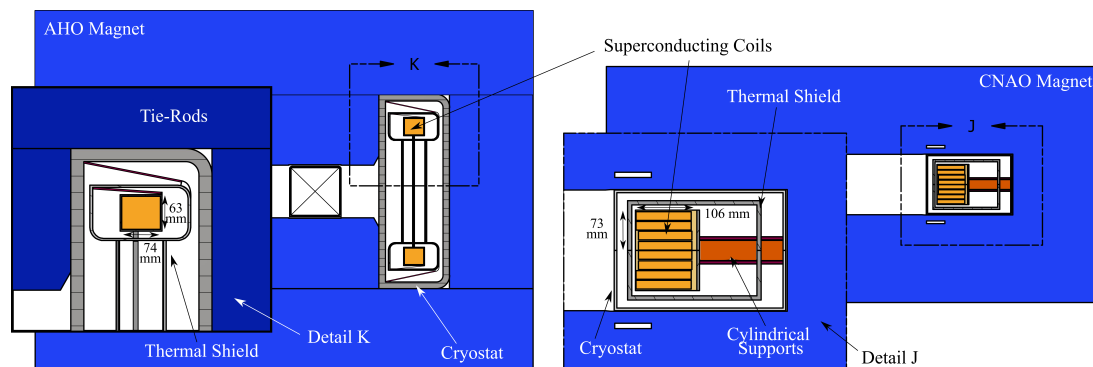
Cross-section of the superconducting design for the AHO magnet and CNAO 90° dipole. A zoomed view of the magnet assembly details is reported. The mechanical structure, the thermal shield and cryostat cross-section are visible.
